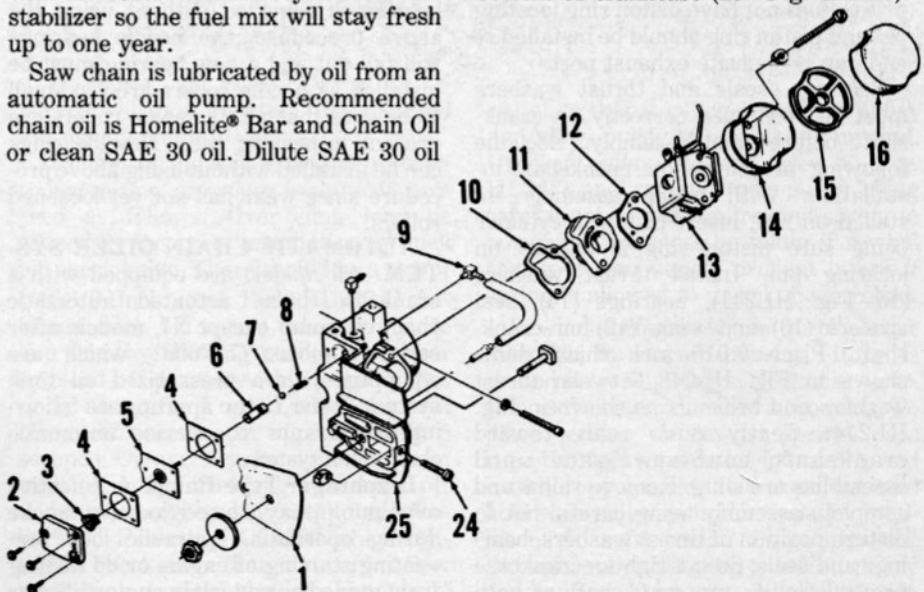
Exploded view of Model XL-2 crankcase and oil pump assemblies. Other models are similar.
